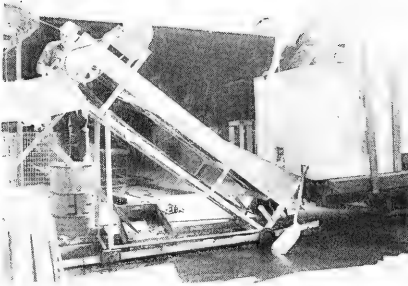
Feed conveyor. This conveyor feeds into the grinder.
